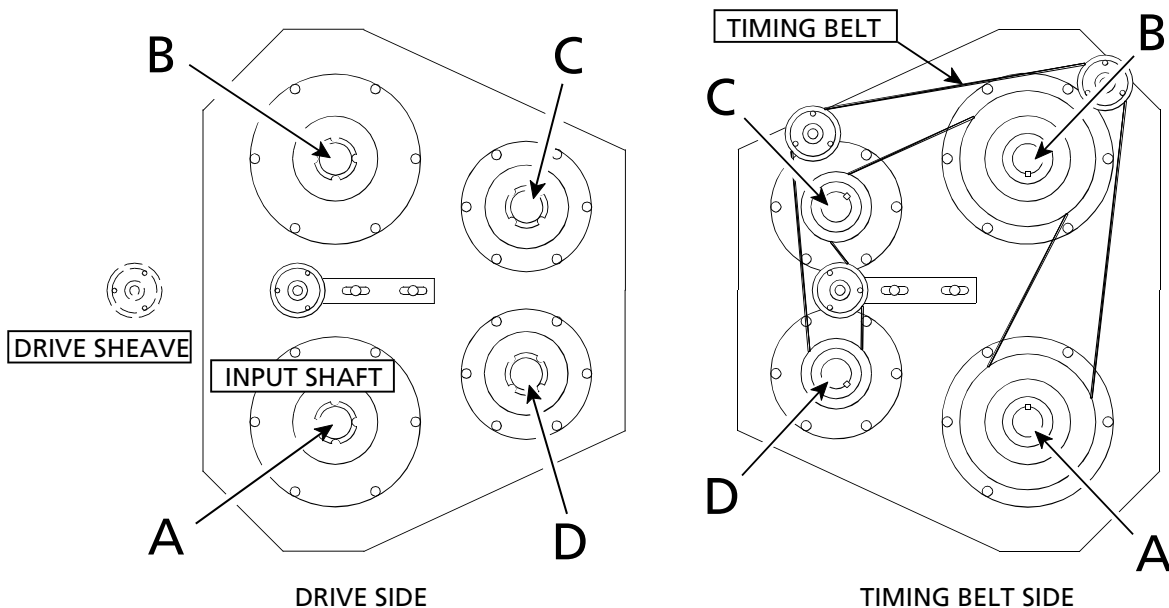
Drive Unit Shaft Identification (Labels shown do NOT appear on ends of actual shafts)
